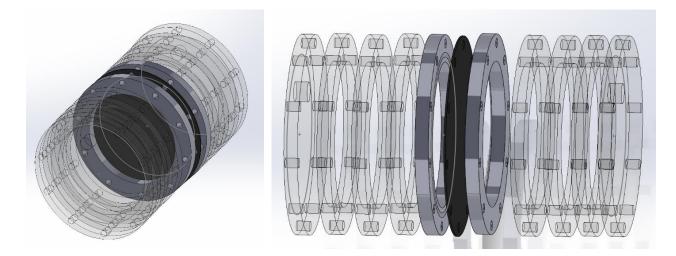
Diagonal, expanded view of diaphragm created in SolidWorks
